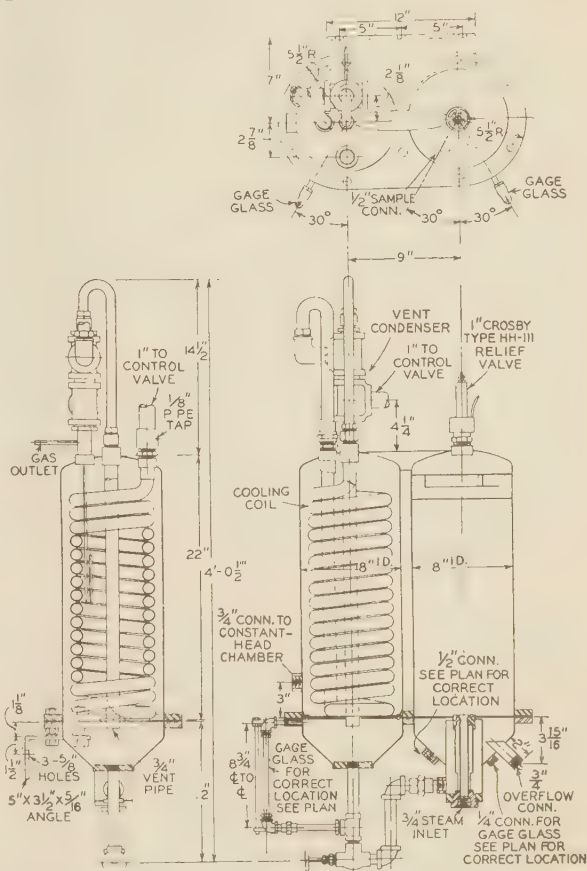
SECTIONAL ASSEMBLY OF DEGASIFIER
